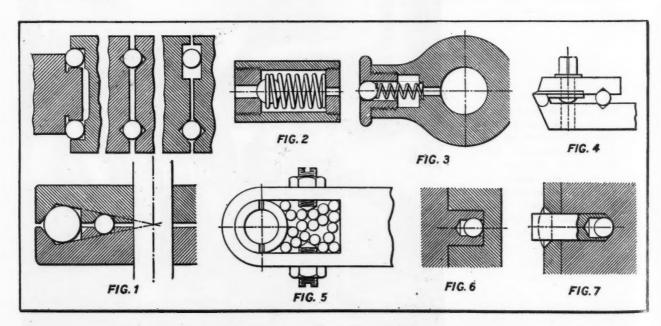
Here is shown a method of taking up wear in bushings, used by engineers in machines that deal with salt-like substances. It can be seen from the illustration that by the adjustment of the two screws, the balls are displaced and so force the brass bushing up to the shaft.
